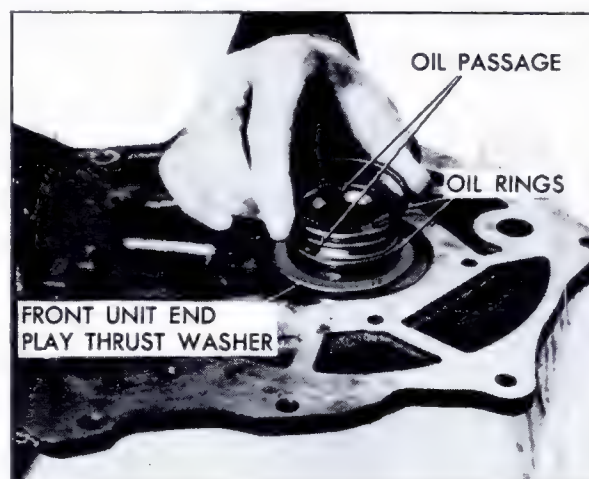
Installing Oil Rings on Driven Sprocket Support
